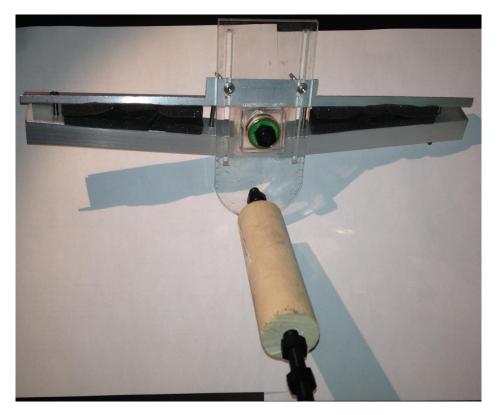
Half of the quadcopter mounting clamp assembly, with the lower support rod with attitude restraint dowel shown
